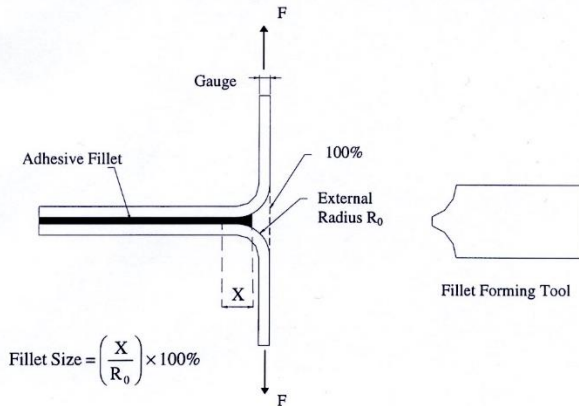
Tool for controlling fillet size in T-peel specimens
